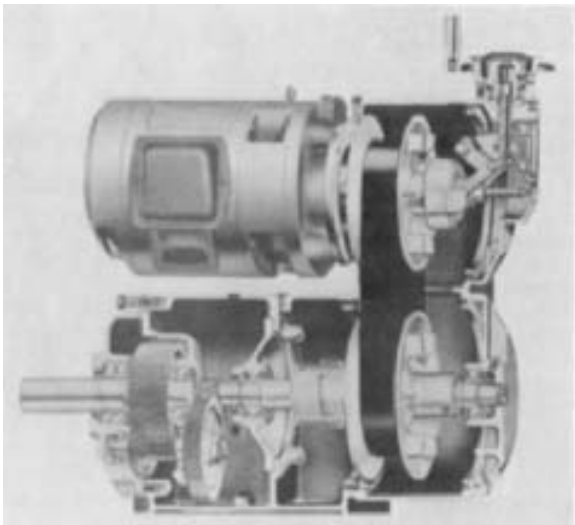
Cutaway view of typical mechanical adjustable-speed drive (Reliance Electric)
